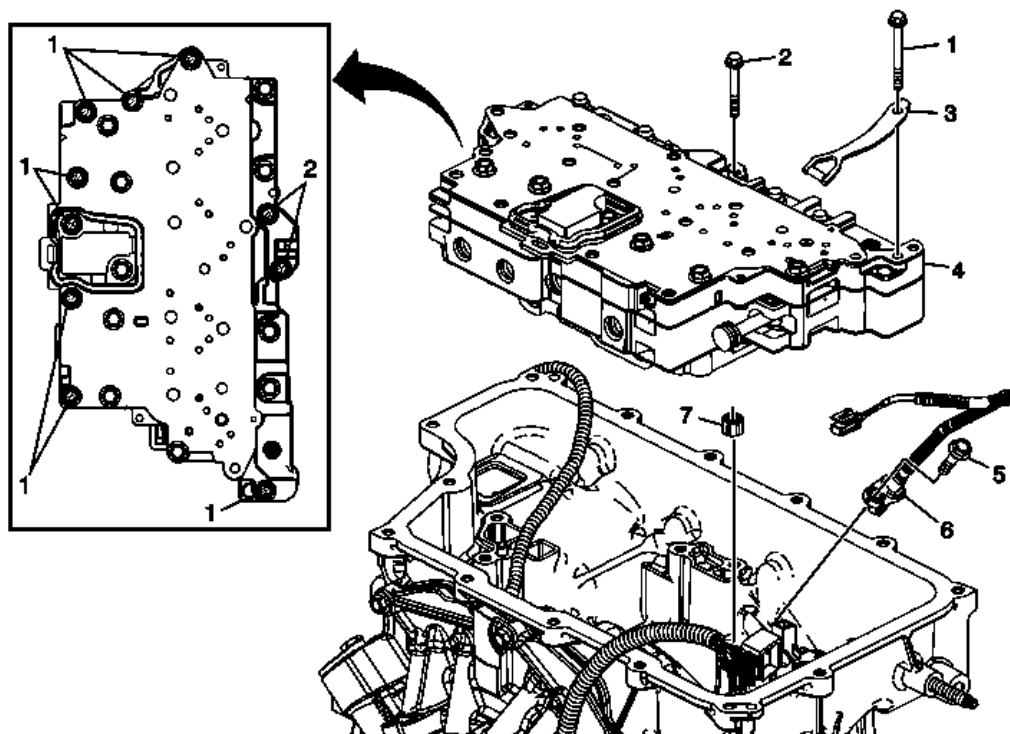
Control Valve Body Assembly and Output Speed Sensor Components
